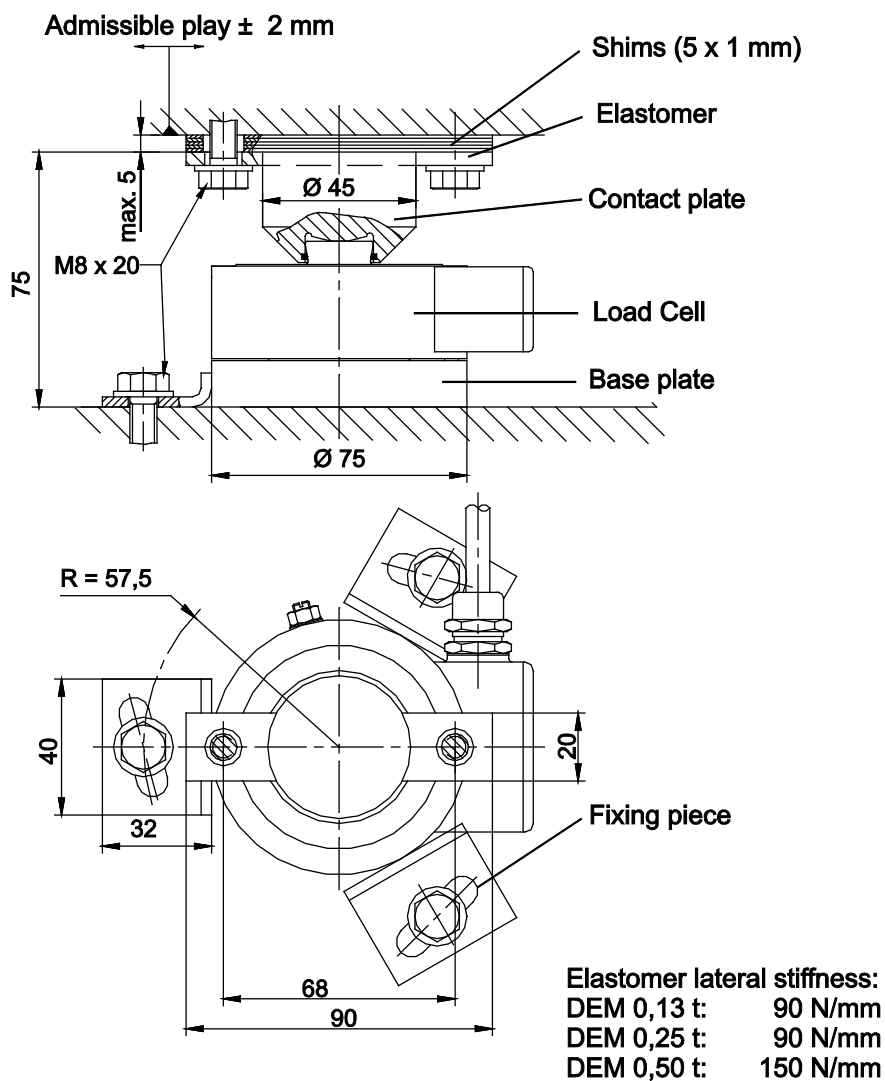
Installation of the 0.13 ... 0.50 t DEM bearing
